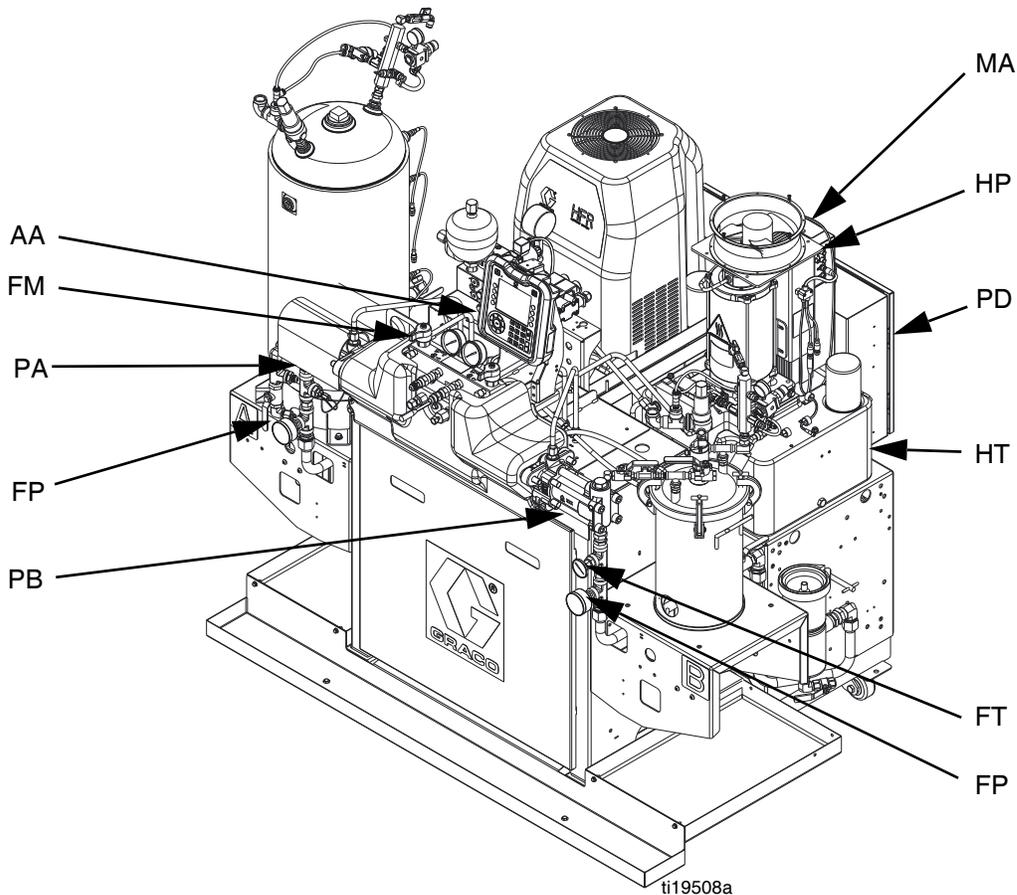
Component Identification, Heated Model shown with shrouds removed
